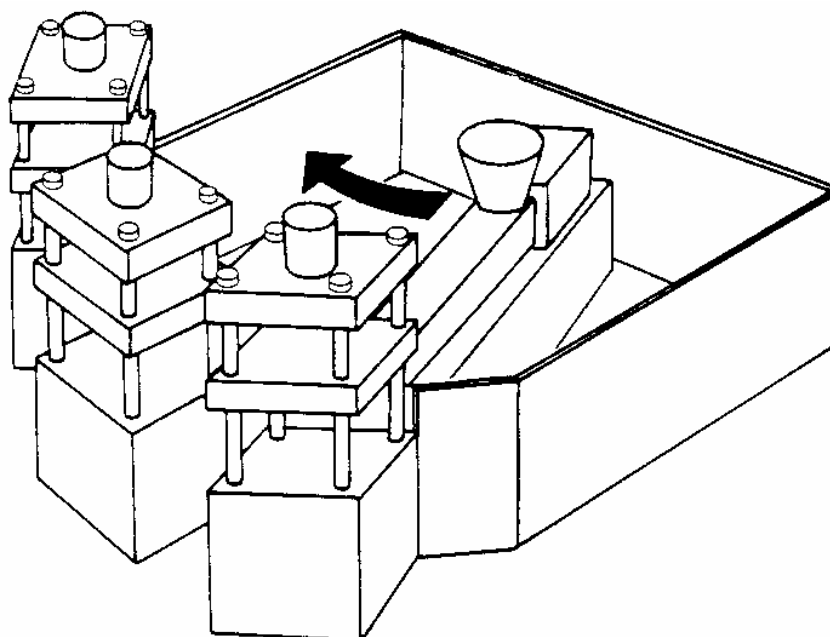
Example of multi-station machine with mobile plasticising and injection unit, shown without guards for the clamping units
